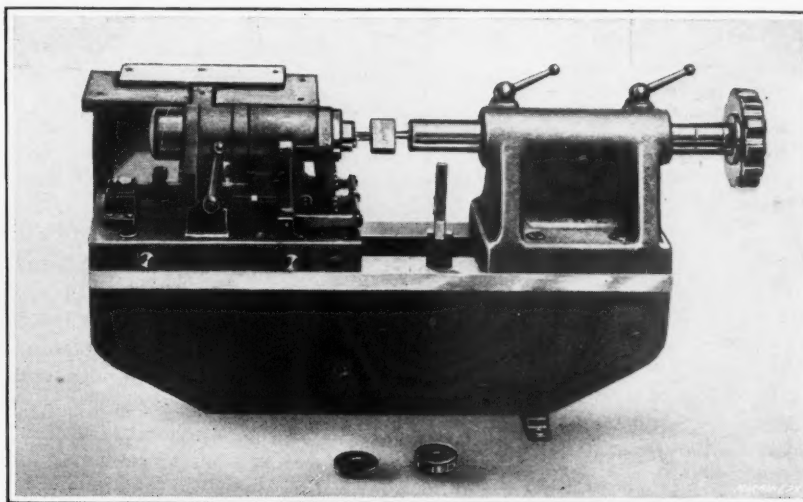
Latest Type of Machine used for comparing Precision Gage-blocks up to Four Inches in Size
